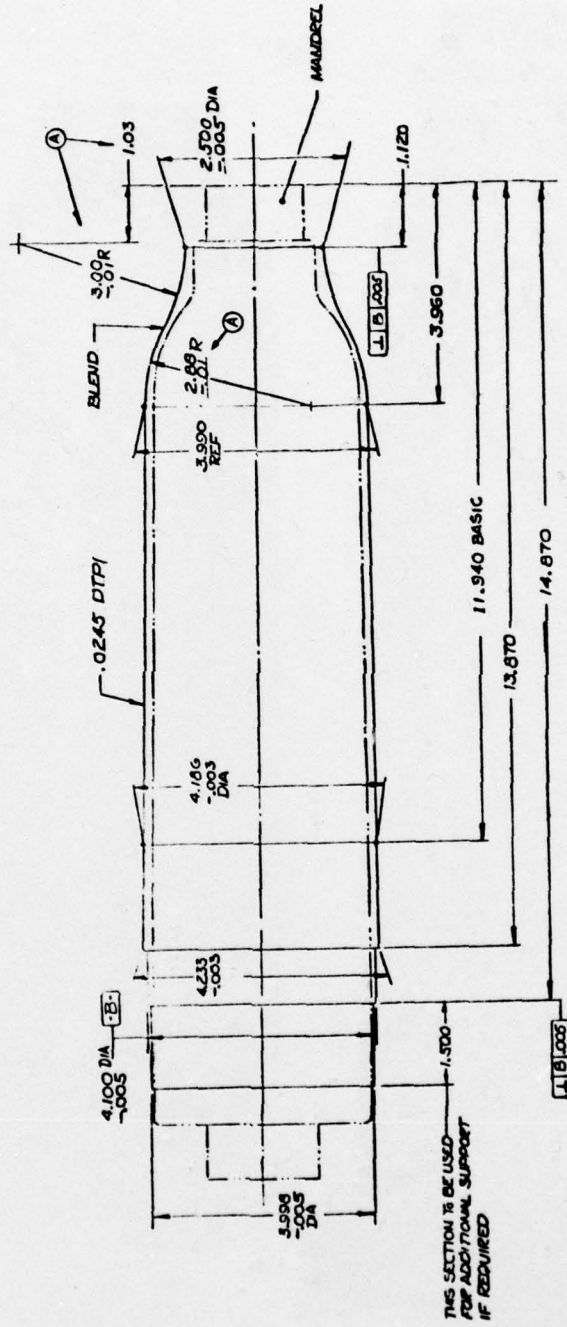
Final machining drawing for cases 60-3 and 60-4.
